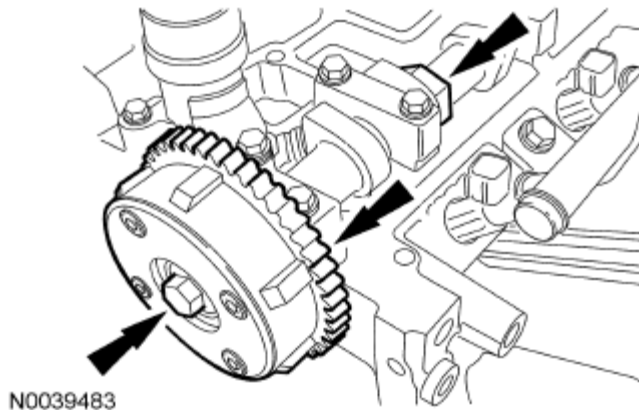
Locating Flats On Camshaft, Bolt And Camshaft Phaser And Sprocket
